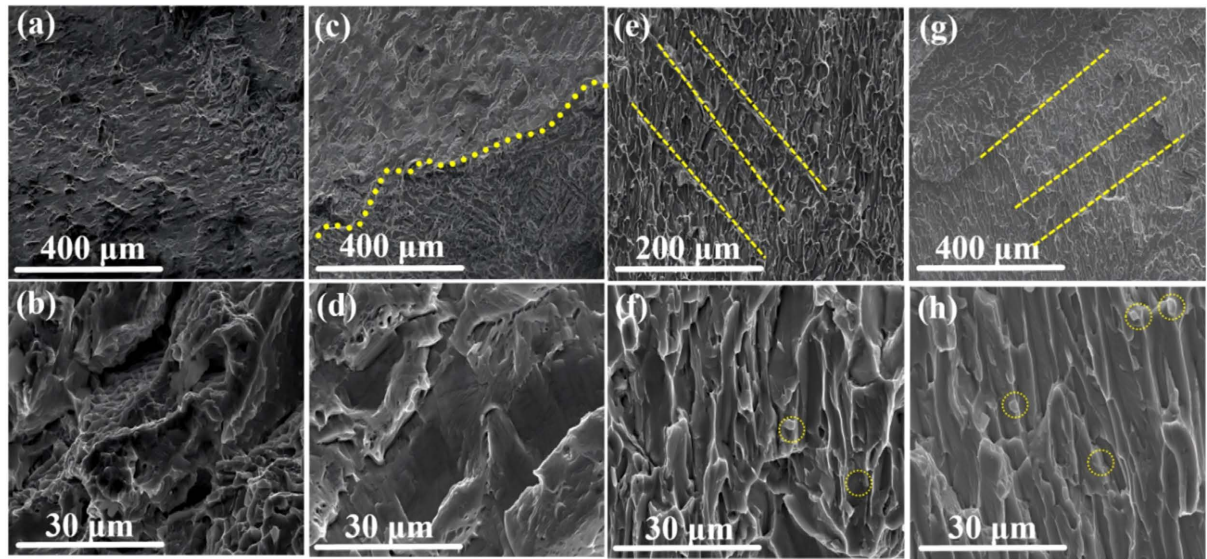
Room-temperature tensile fracture surface morphology of the cast- $V_x$  alloy
